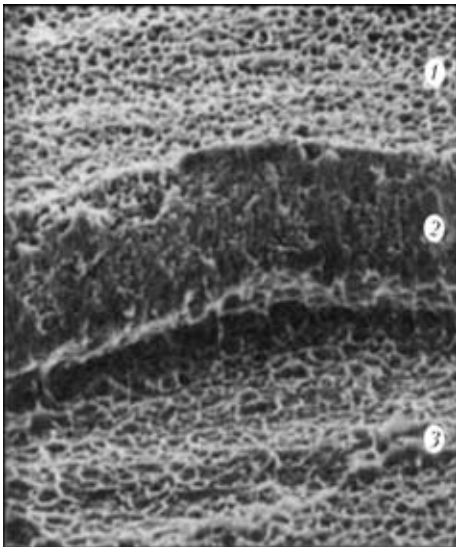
Fractogram ($\times 800$) of fracture surface of the welded joint sample: 1 – surface of sintered powder layer after fracture; 2 – section of intermediate sintered powder layer (thickness of layer after welding and fracture); 3 – places of pit
